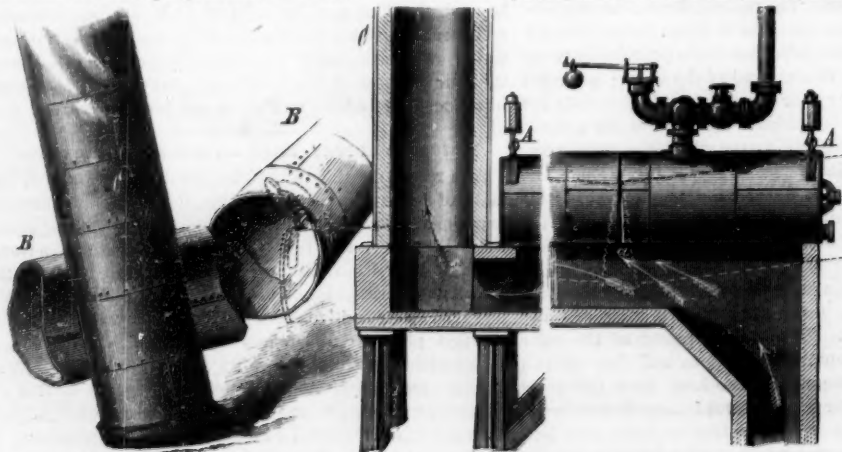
BOILER EXPLOSION IN POTTSVILLE PA.—SIDE ELEVATION, SHOWING COURSE OF FLAME AND HOT GASES.
